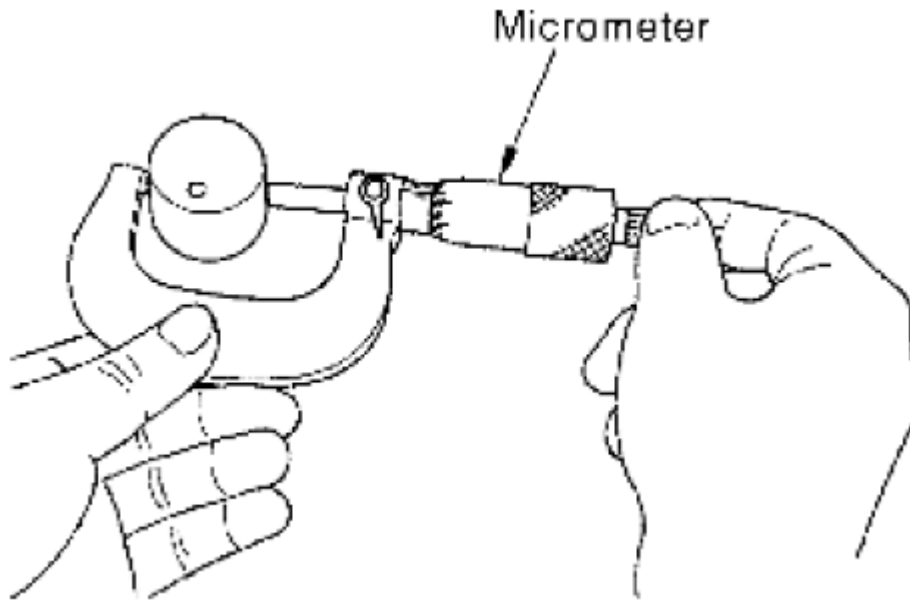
Checking Surface Of Valve Lifter Or Cracks
